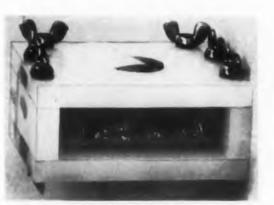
Polyethylene sheet mold, with assembly mounted in position prior to pouring encapsulating compound.
